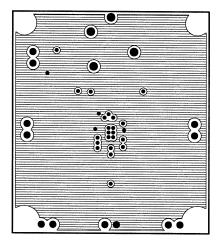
Recommended NHW PC board layout: upper inner-layer layout
